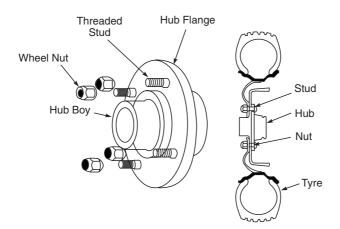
Fitting of the Disk Wheel to the Hub
